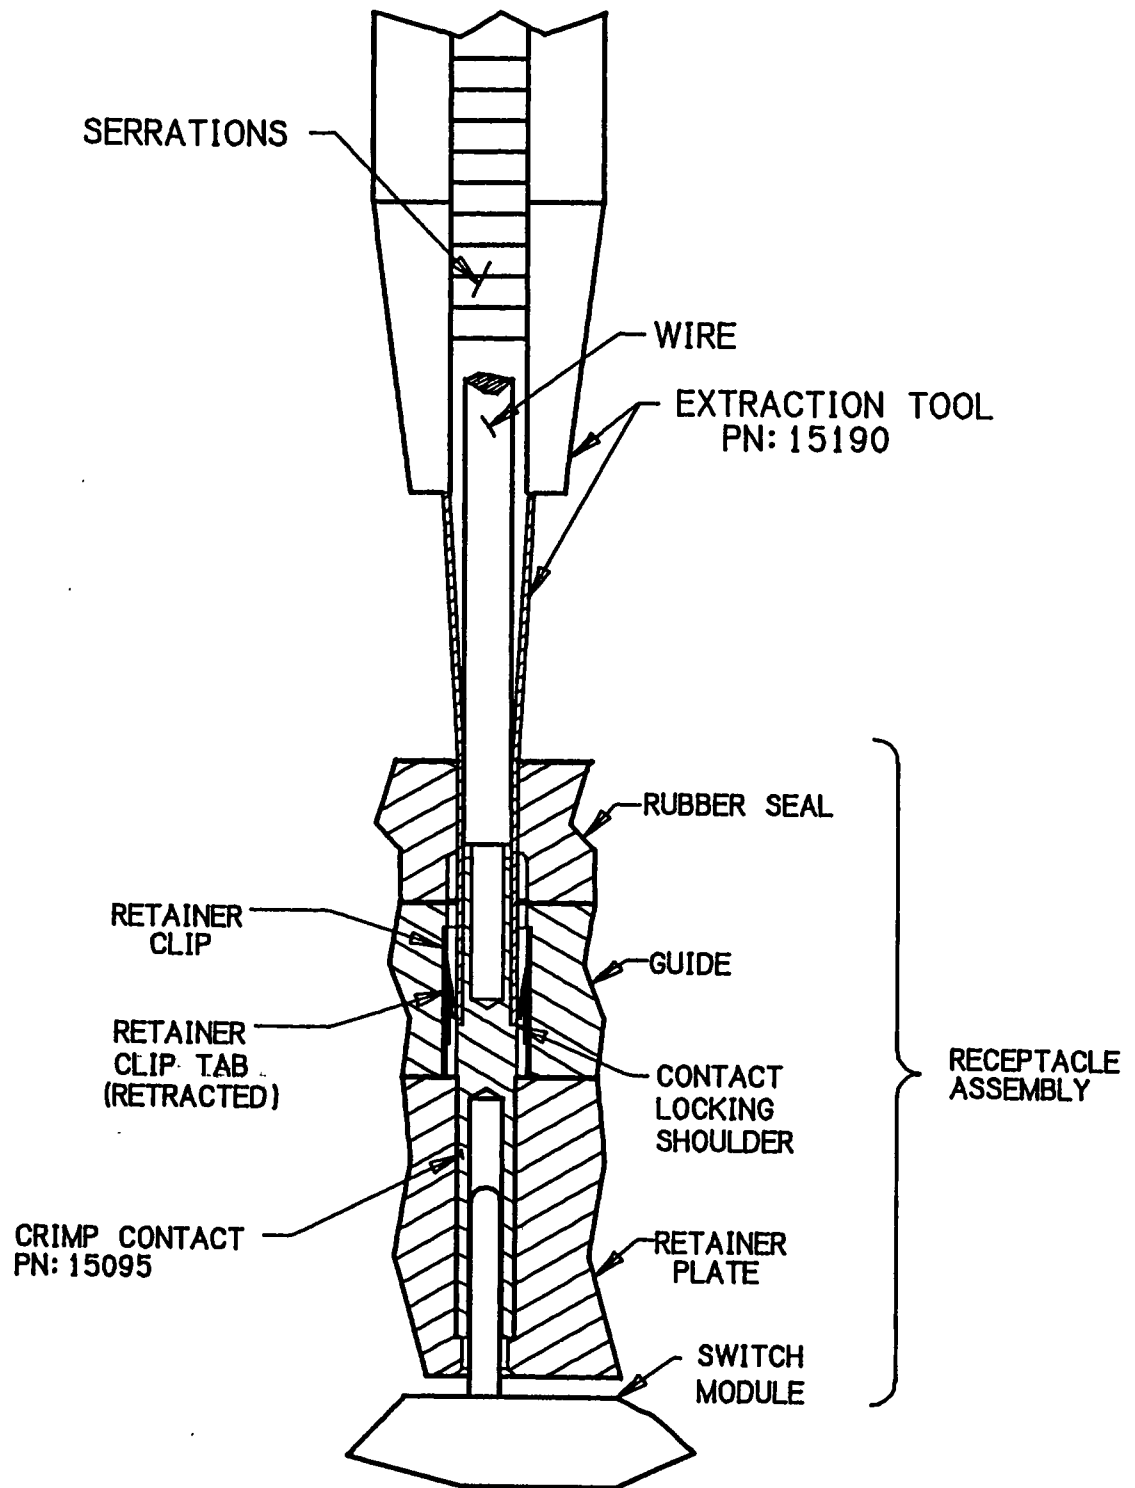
EXTRACTION OF WIRE-CONTACT ASSEMBLY
